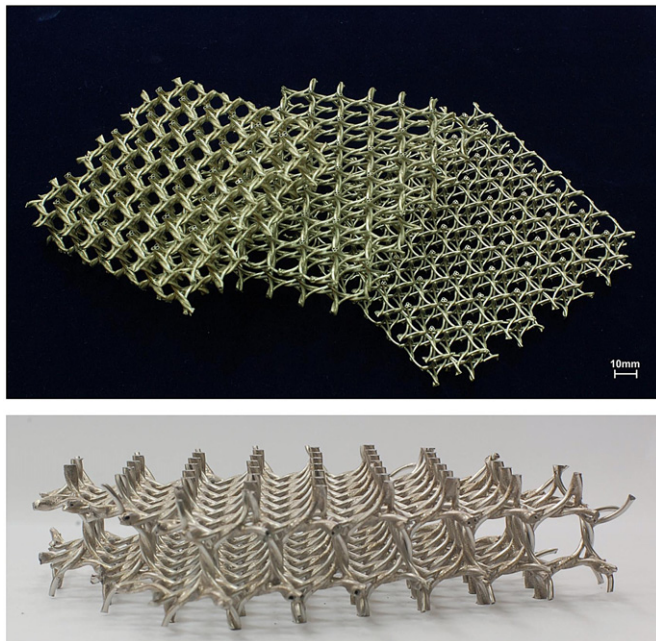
Tube WBK specimens composed of three different tubes (top) and a side view of the middle one (bottom).
